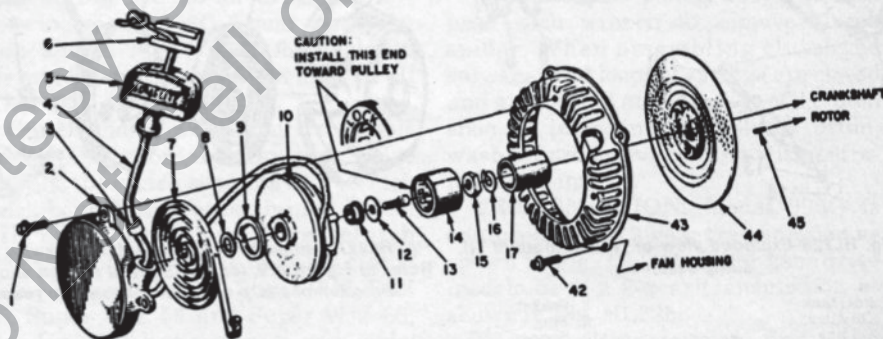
Exploded view of over-running clutch starter used on models 995D and 995G. Special tools required to remove and install over-running bearing (14) are puller (Homelite tool No. A-23679).
